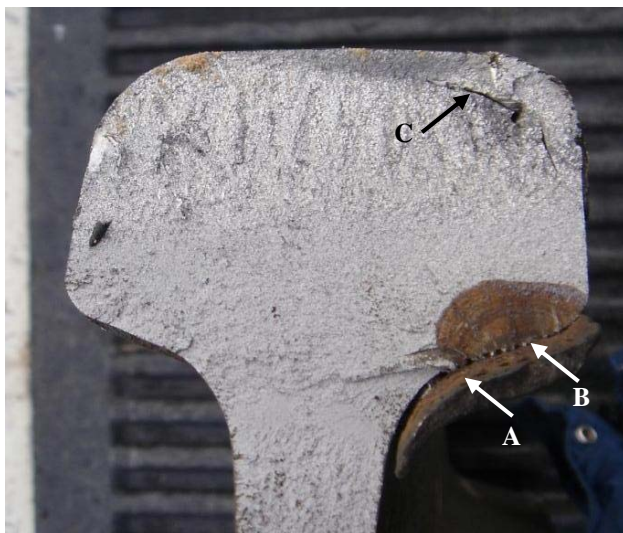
Fatigue Fracture of a Railhead Repair Weld. (A) Cold Lapped Weld Material under Railhead (B) Fatigue Fracture Initiation Site (C) Subsurface Shelling at Gage Corner
